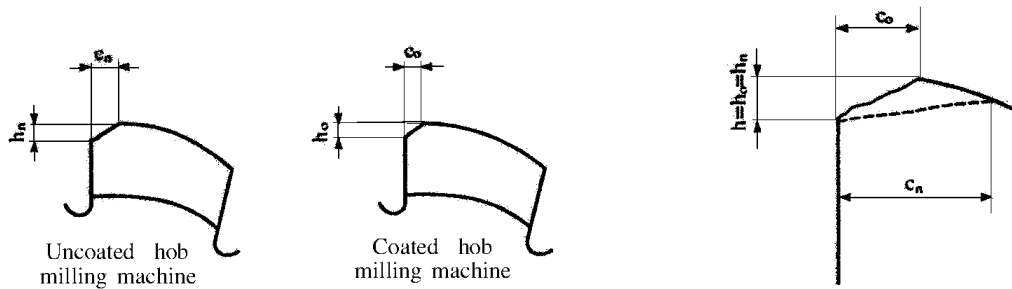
Differences between ratios and rounding of the acrons of the cutting edges of the uncoated and coated hob milling machines
